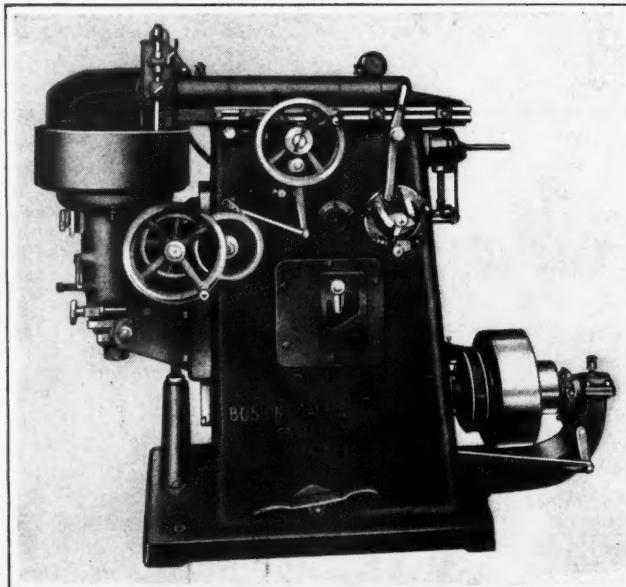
Rotary Surface Grinding Machine built by the Boston Scale & Machine Co.
